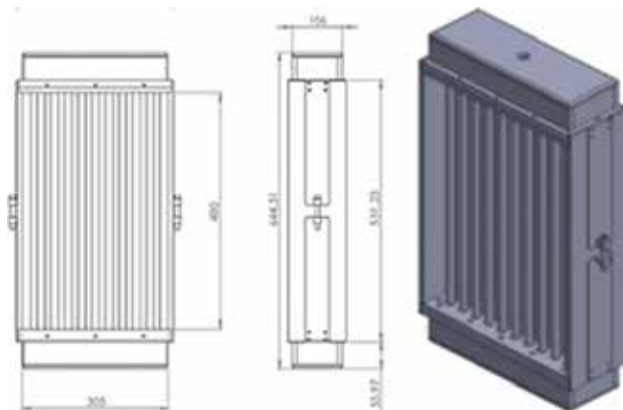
Frontal, lateral, and isometric view from heat exchanger (dimension in millimeters).
